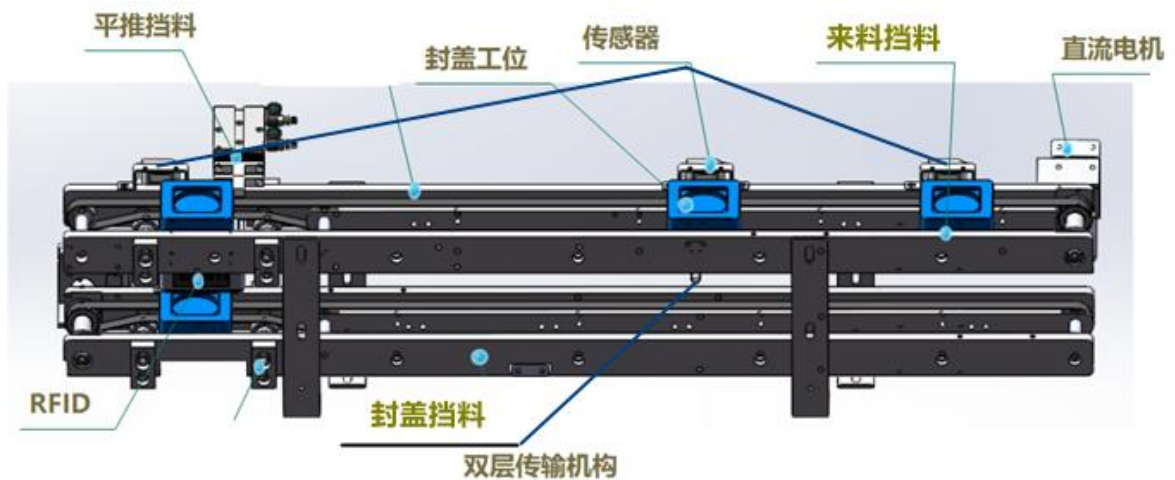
Description of mechanism components of two-layer transmission module 2 (robot assembly station)
